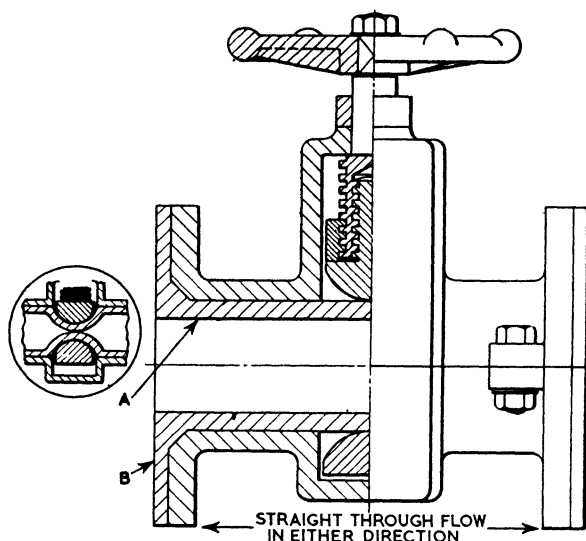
SECTIONAL VIEW OF THE “LINATEX” VALVE, (INCORPORATING WARREN MORRISON DESIGN).
